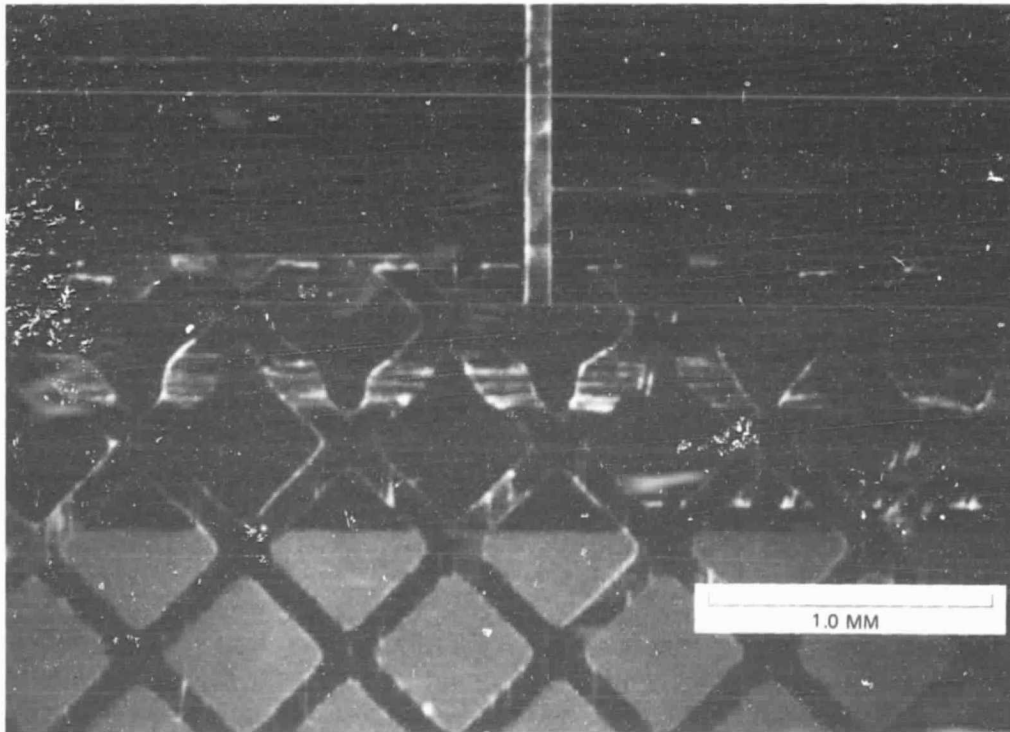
ULTRASONIC WELD FRONT
